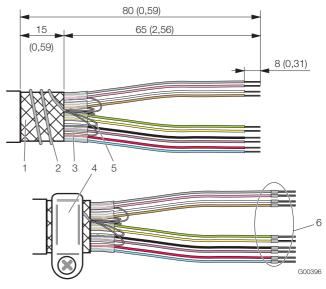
Signal cable assembly, dimensions in mm (inch)
